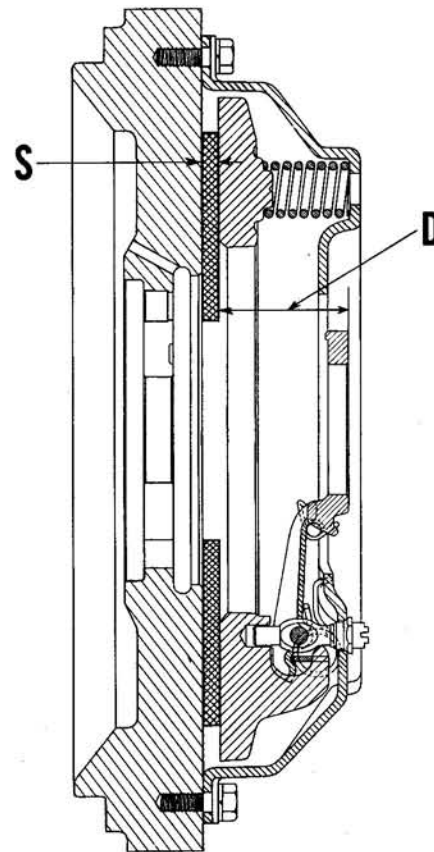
Cross-sectional view of 13-inch clutch cover and pressure plate assembly mounted on flywheel with three spacers (S) between plate and flywheel for adjustment. Refer to text for thickness of spacer (S) and lever height dimension (D).
